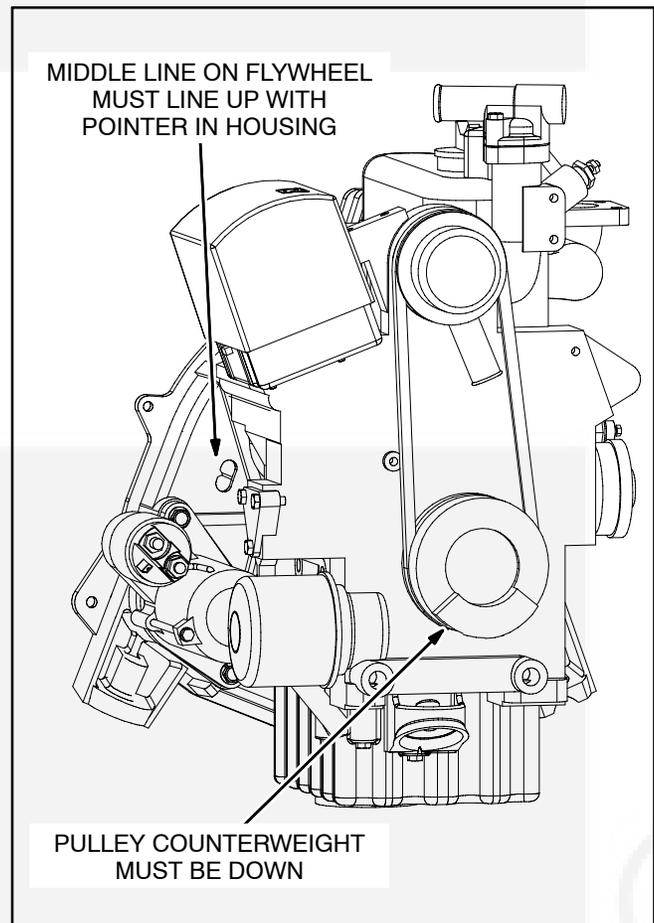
ROTOR-CRANKSHAFT ALIGNMENT
